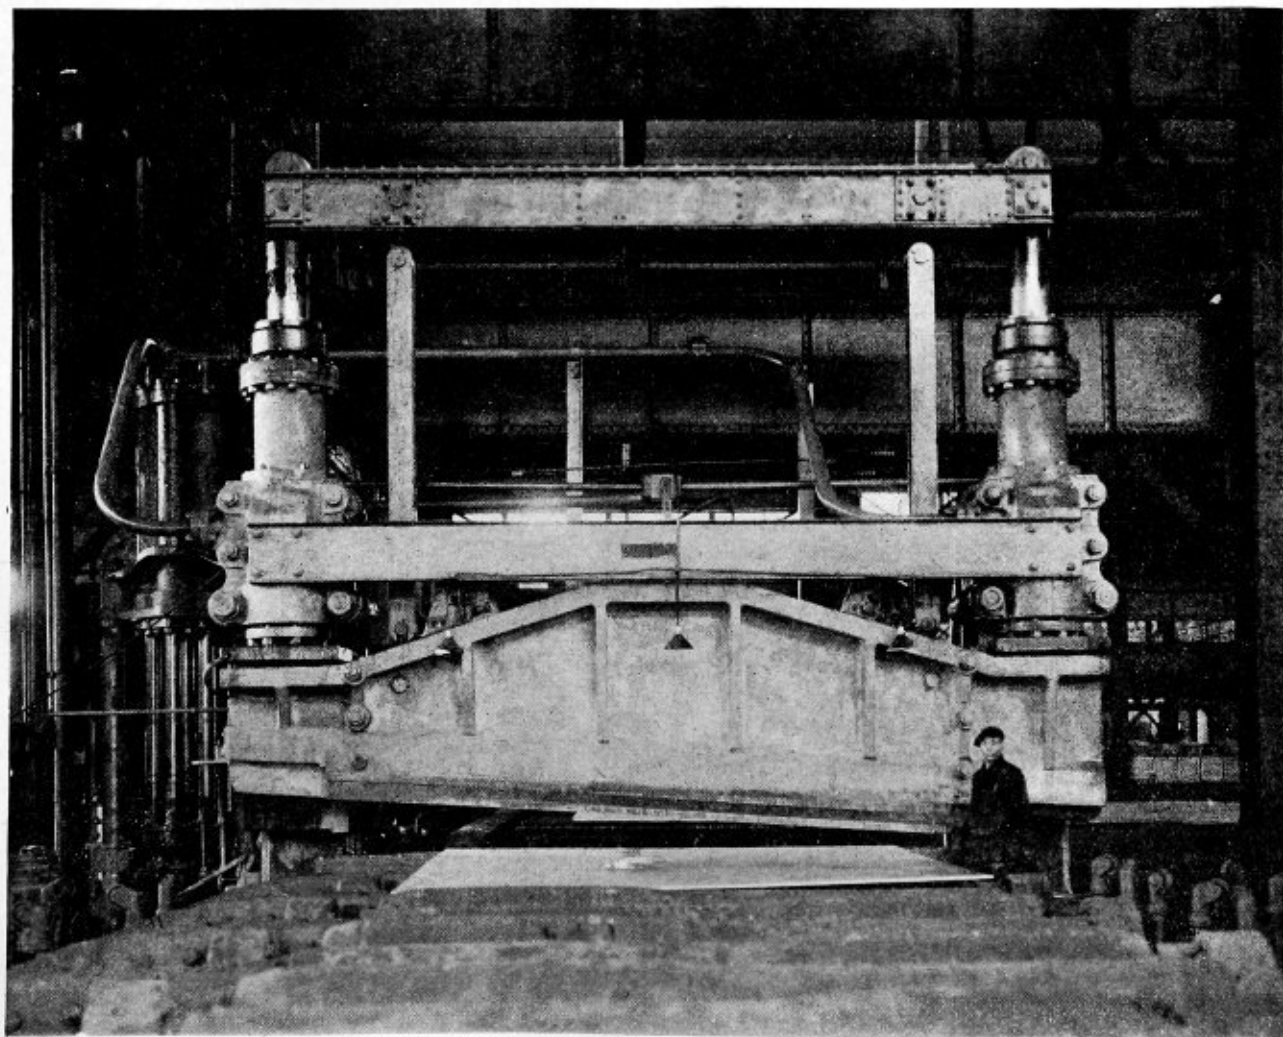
View of Hydraulic Shears Capable of Shearing Material 2 Inches Thick. The Knife is 215 Inches Long; Shears, Between Housings, 210 Inches
